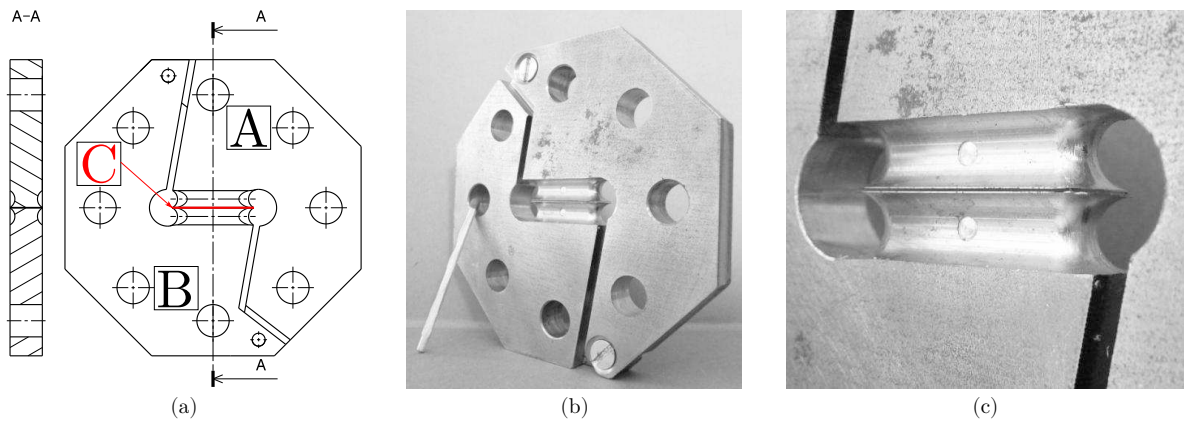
Tensile/Compression-Shear Arcan Test. (a) Technical drawing. (b) General view of the test specimen [29]. (c) Zoom on the local geometry of the beaks [29].
